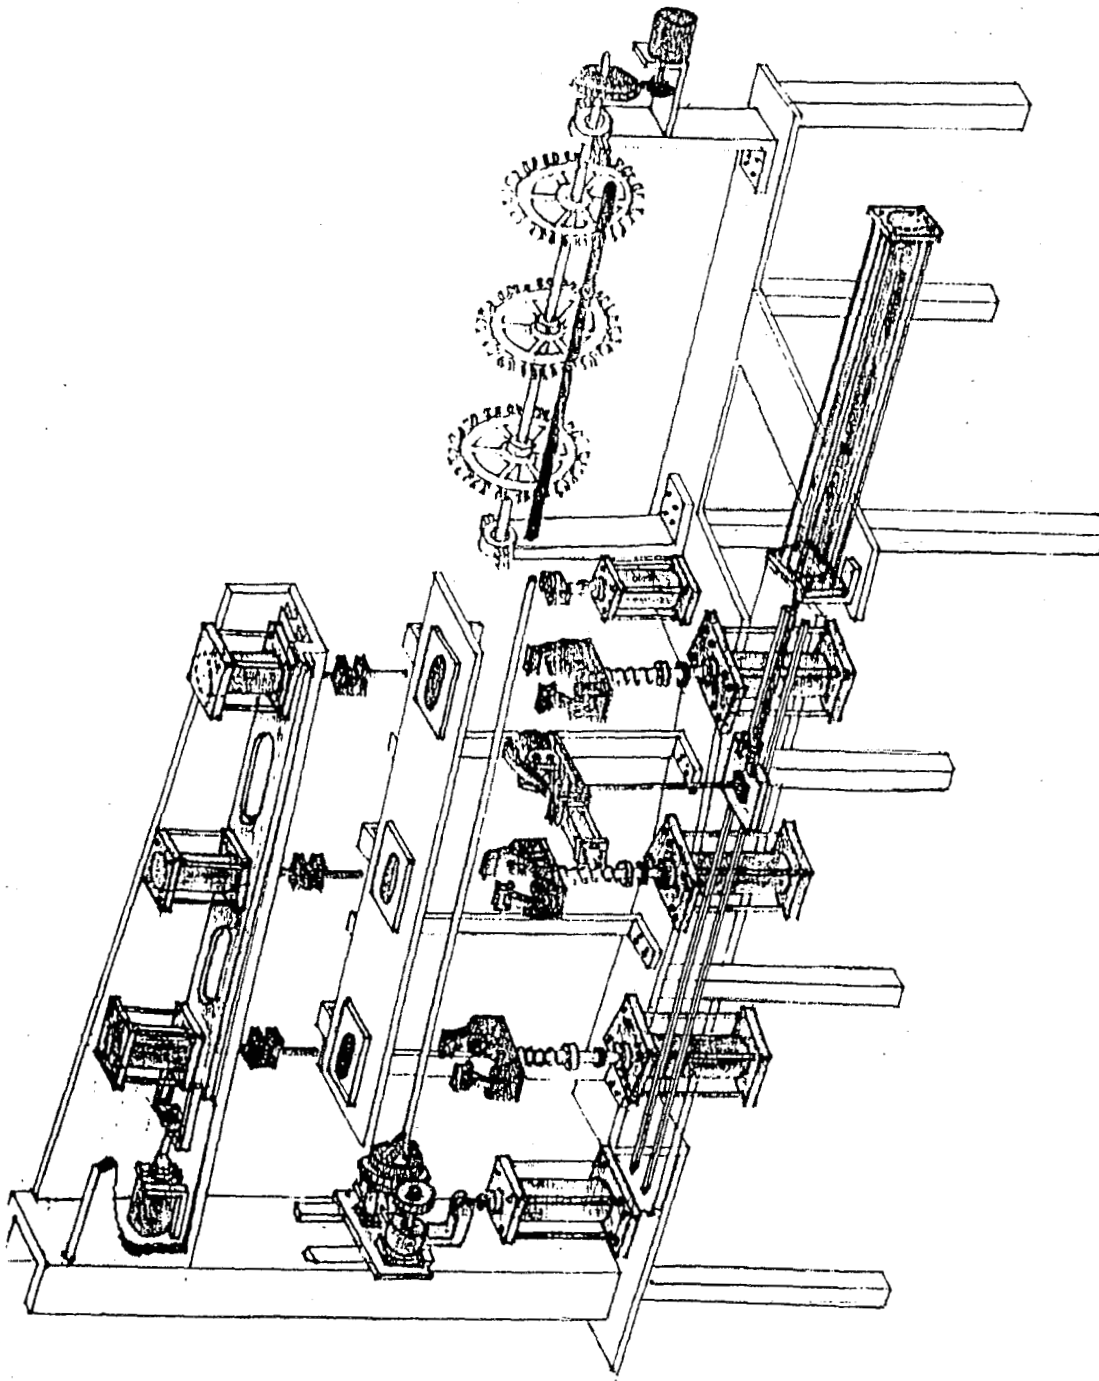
APPENDAGE WELDING SYSTEM (SCHEMATIC)
